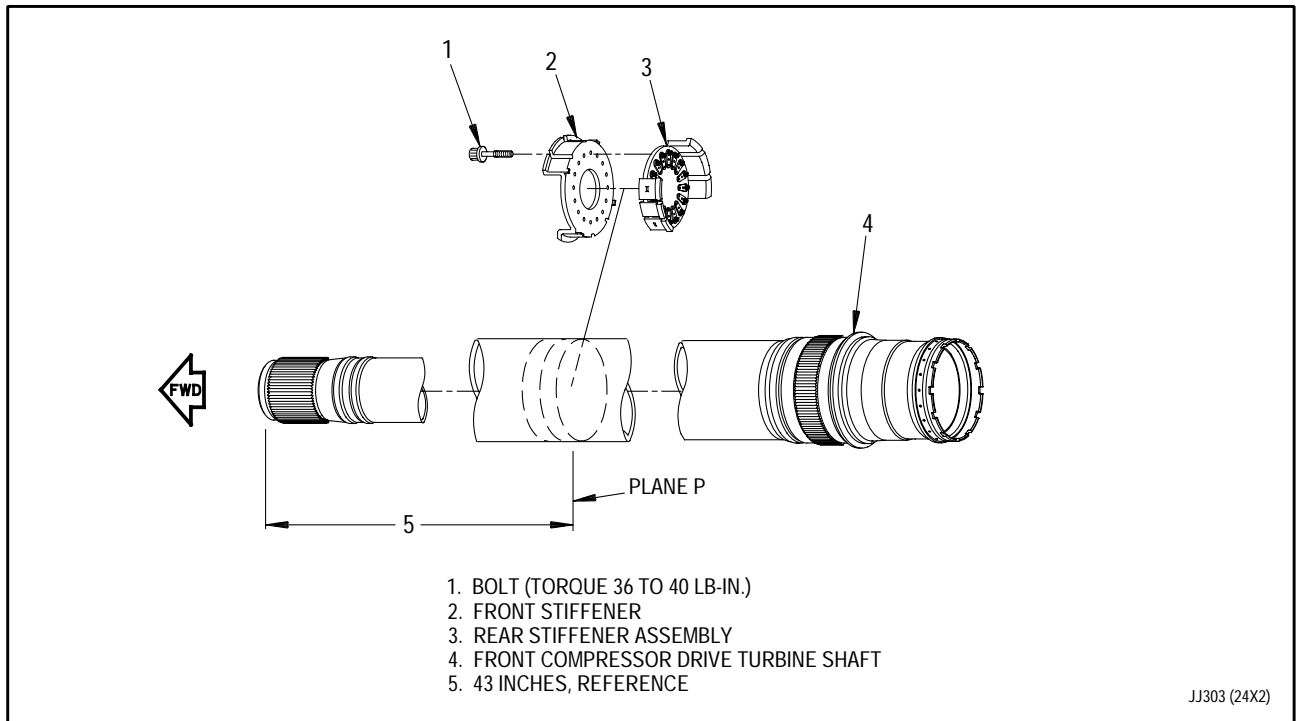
Front Compressor Drive Turbine Shaft Stiffeners - Assembly
